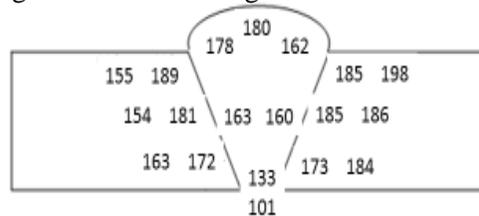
Weld piece at WI= 110 A at cap, Ws (at face) = 0.9 mm/s and Ws (at root) = 1.3 mm/s.
